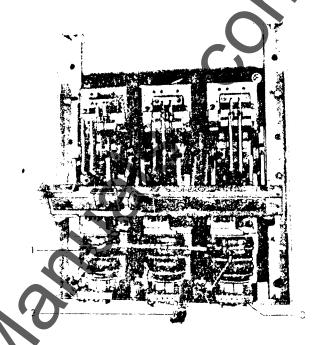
(8039669) Front view of back frame assembly - AK-3-50
